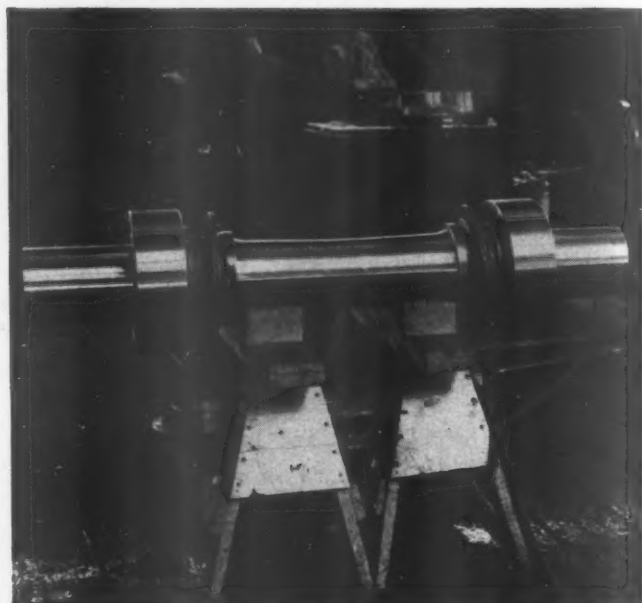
Engine truck axle just after the application of SKF roller bearings which have been expanded slightly in the 300-deg. F. oil bath shown in the background
